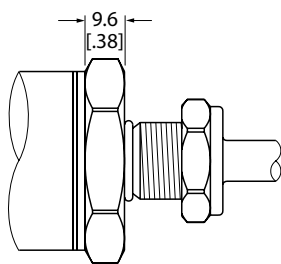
Design with flat face (F10) – Housing nut with thread, dimensions in mm [in]
